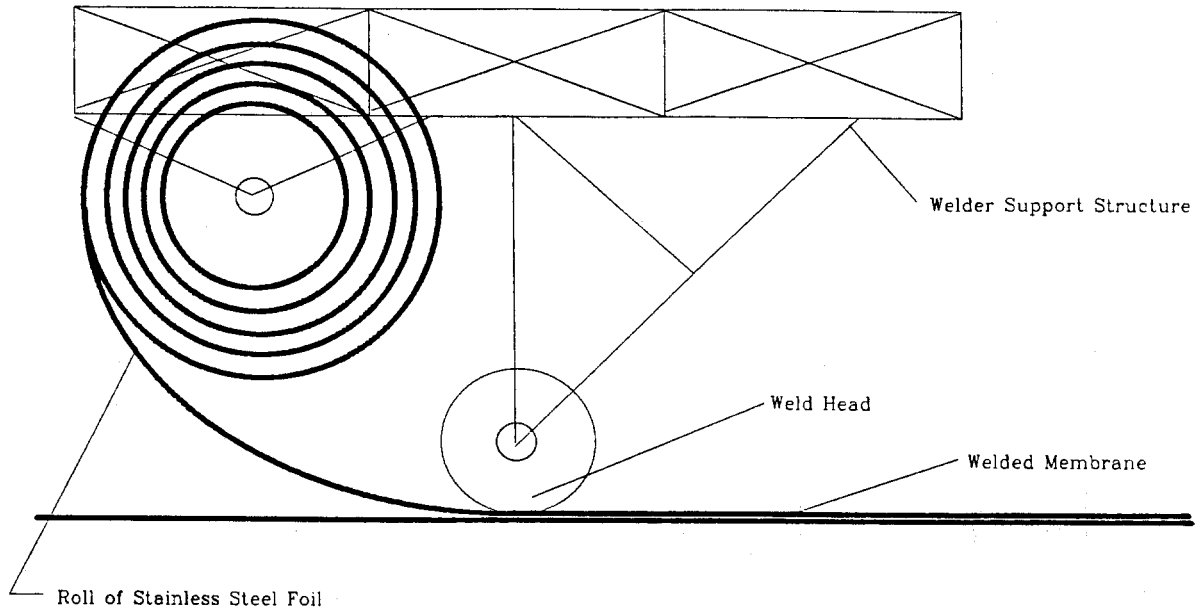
Direct Feed of Stainless Steel Foil to Weld Head
